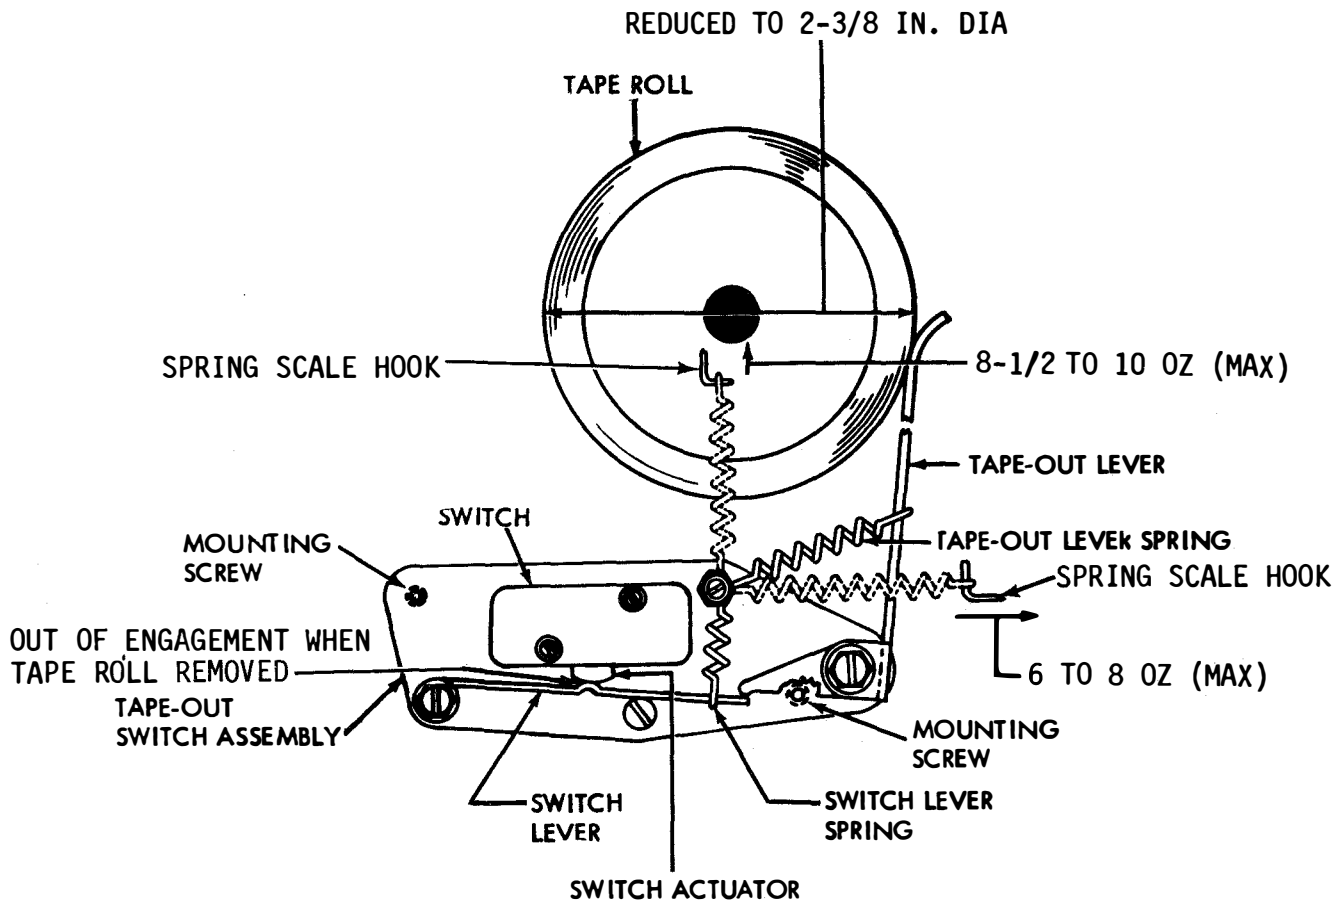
Tape-Out Switch Assembly, Switch Lever Spring, Tape-Out Lever Spring and Tape-Out Lever
